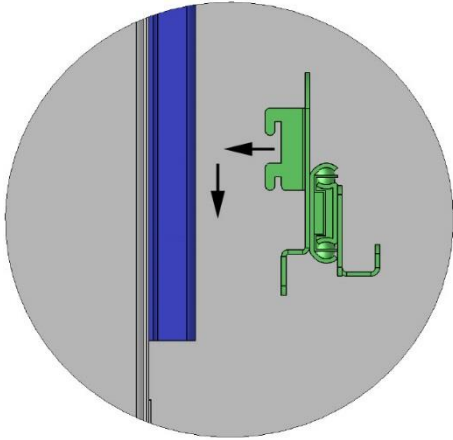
Standard Shelf Installed on Mounting Brackets
